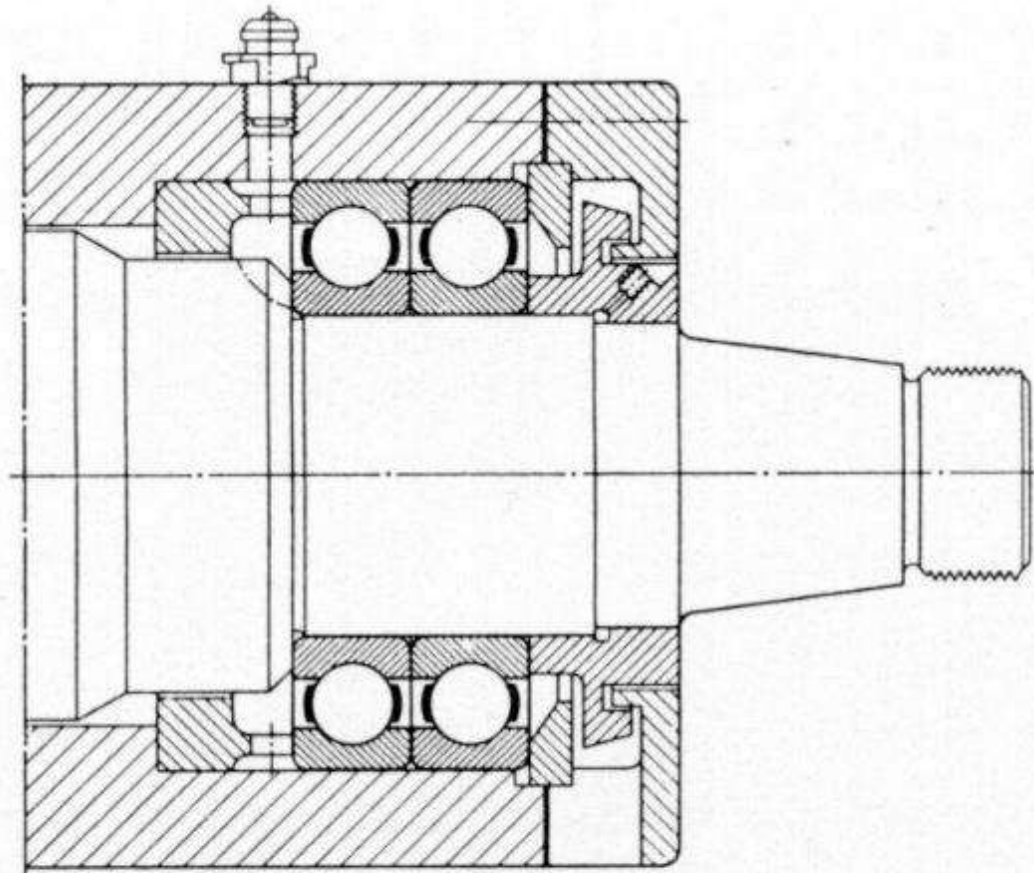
Grease escape valve for high-speed grinding spindle bearing arrangement
